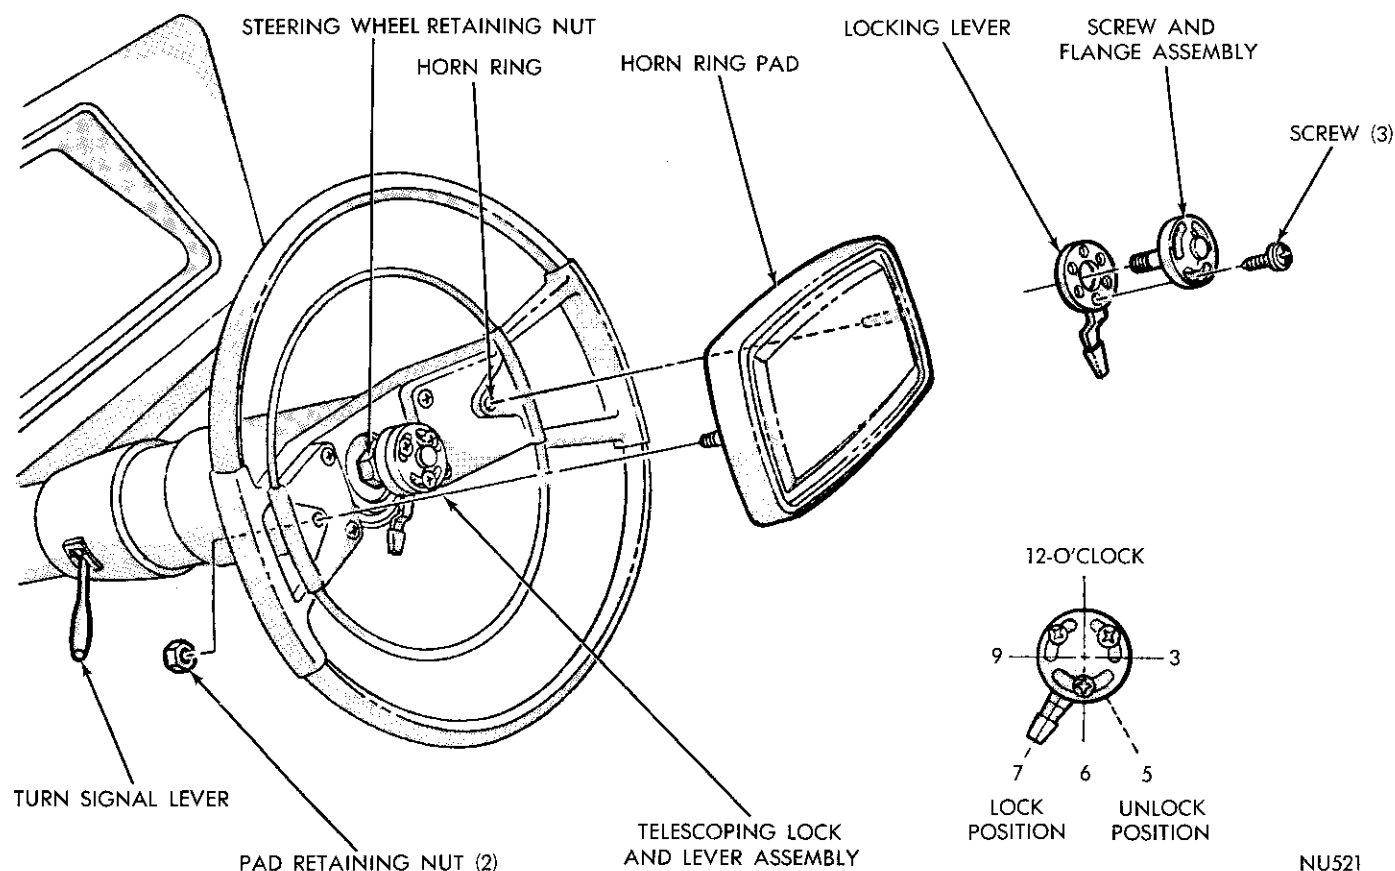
Telescoping Steering Wheel—Locking Mechanism
